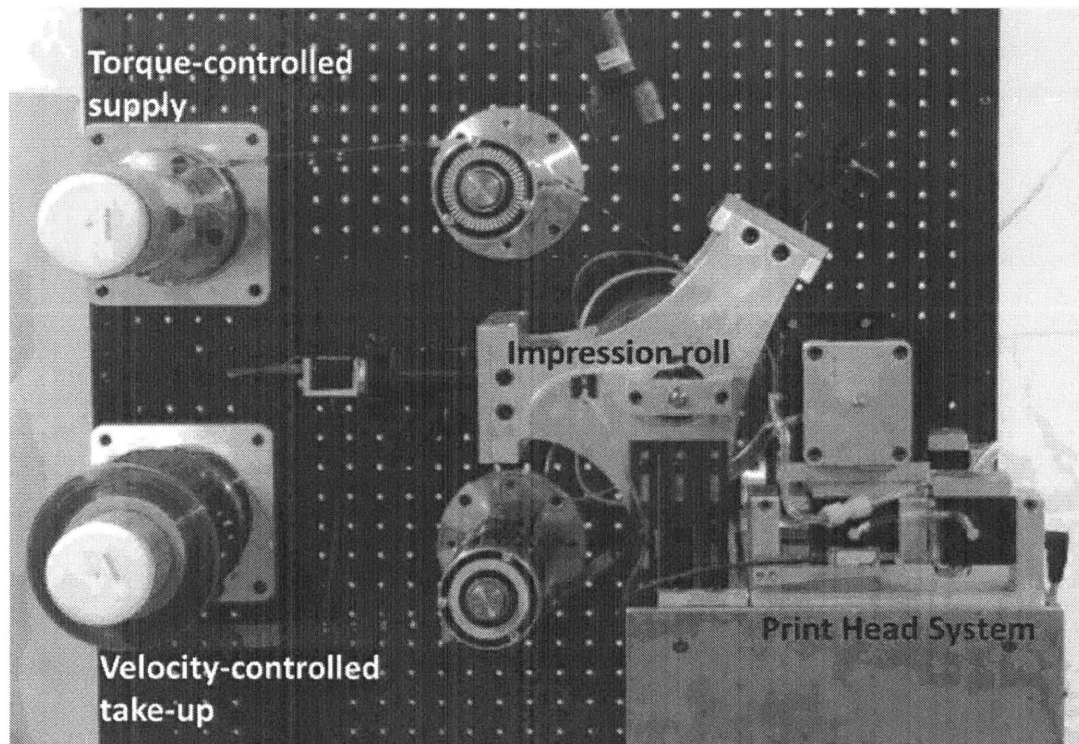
Side View of μ Flex Machine: Feed and collection rollers on the left, idler rollers in the middle, glass roller behind camera, force controller and stamp bearing roller on the right; C. Merian, "Development of an Inking System for Continuous Roll-to-Roll Microcontact Printing of Hexadecanethiol (HDT) on Gold-coated PET Substrate," Thesis, Massachusetts Institute of Technology, 2016
